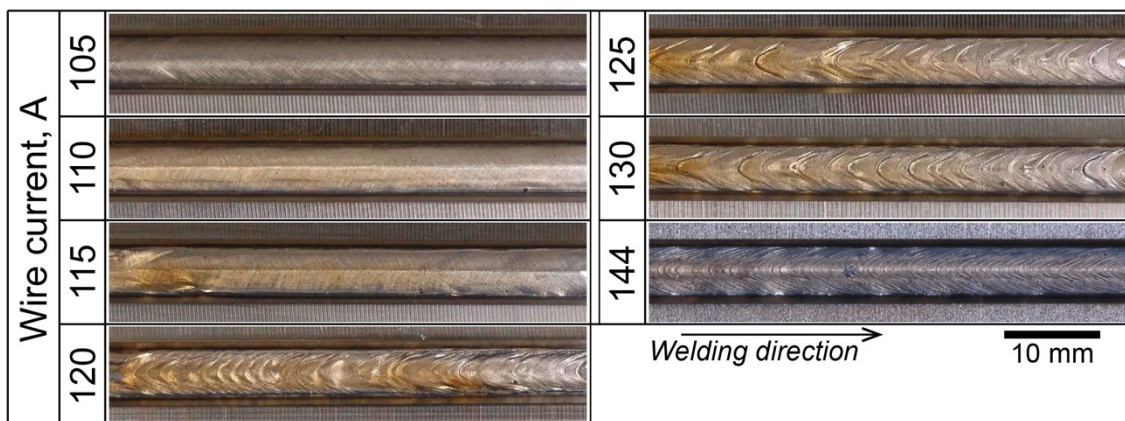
Appearance of weld bead with each wire current on SUS310S by hot-wire GTAW.
